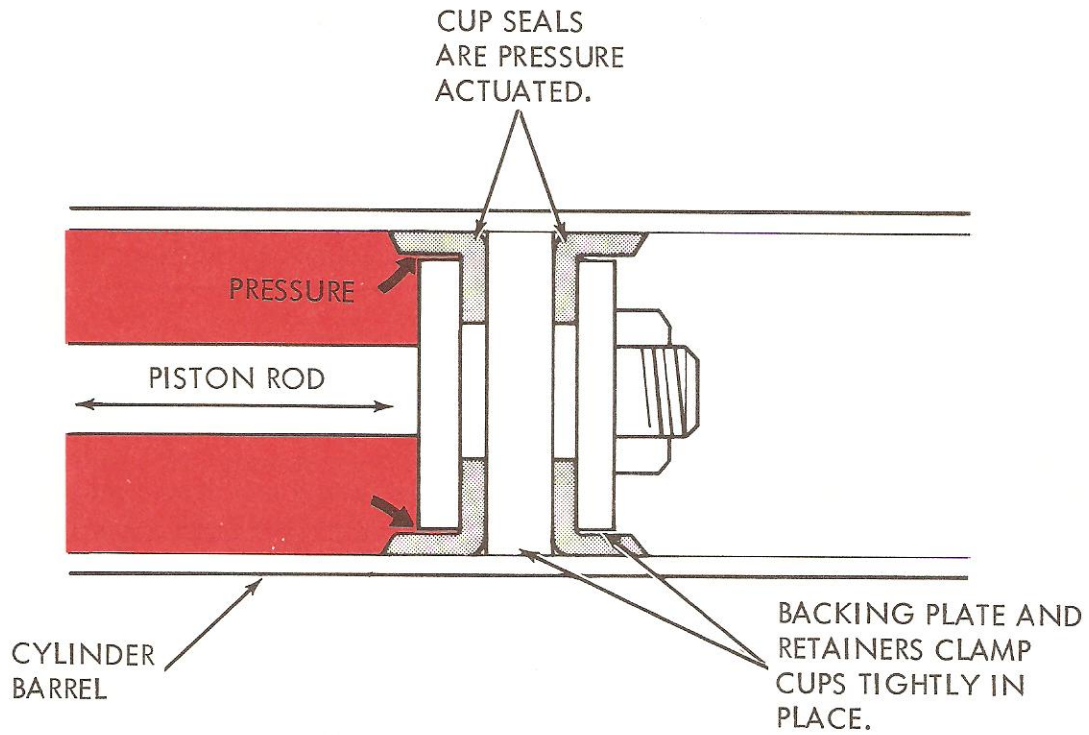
Cup Seals are Used on Cylinder Pistons
